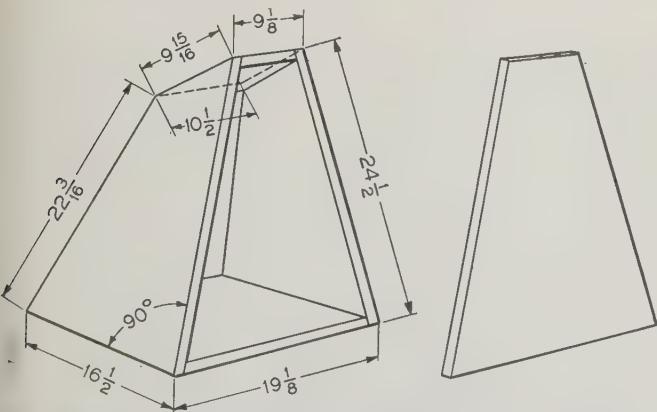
Box with no 2 sides parallel used for measuring motor noise; all dimensions in inches
